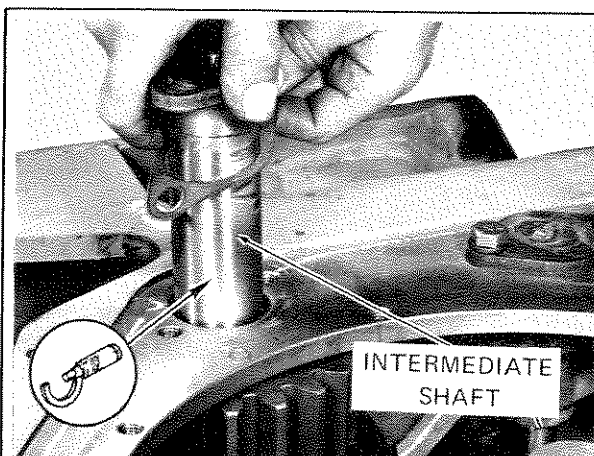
Removal of Drum Shaft And Drum (Sheet 2 of 2)
